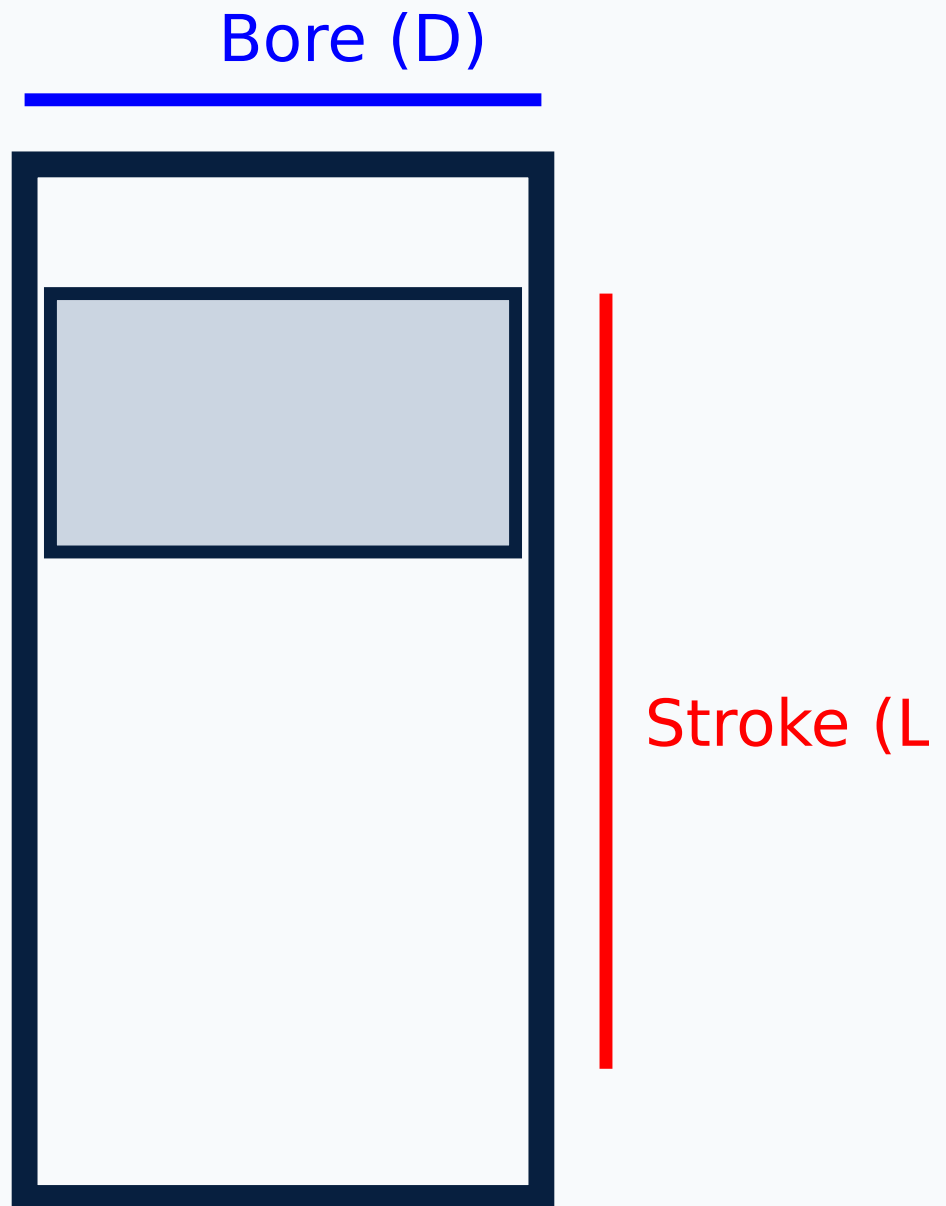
Basic Engine Cylinder Dimensions (Bore and Stroke)
